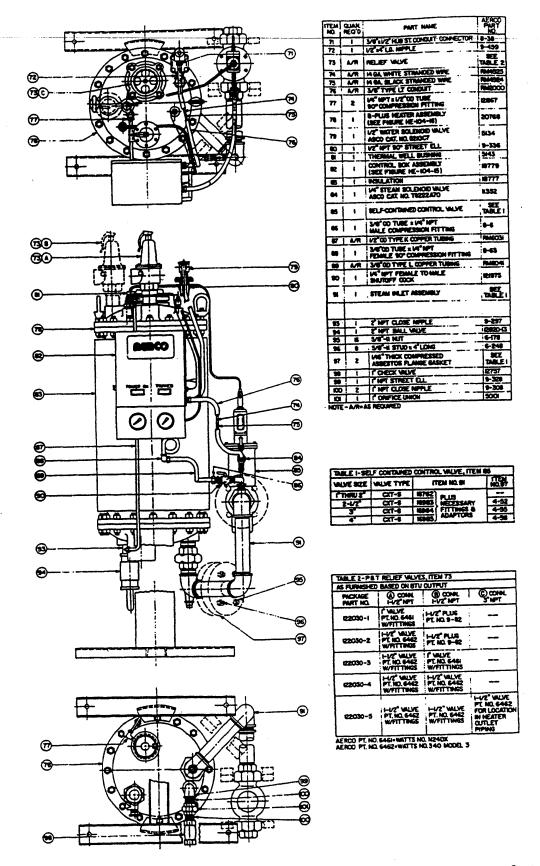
AERCO Model SWIB-PLUS Packaged Water Heater with Self-Contained Steam Control Valve
